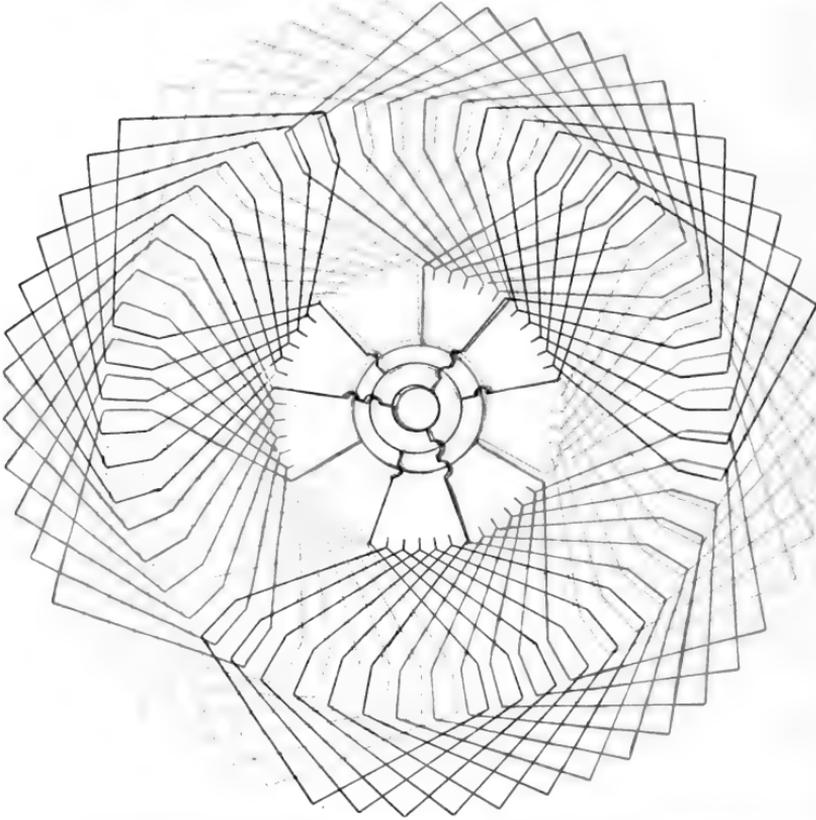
Winding for a Three-phase Rotary Converter, Six-circuit Single-winding with 108 Conductors, Six Poles. Front Pitch 19, Back Pitch, 17.
